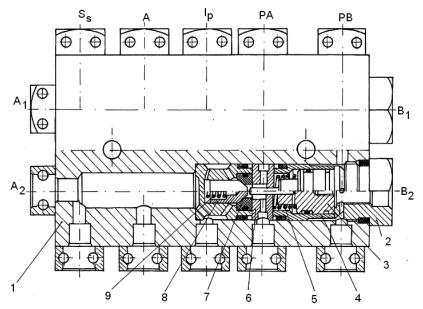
Double deblockable valve of direction: 1-valve body; 2 –piston cover, 3-piston with rod, 4-piston sleeve 5-come-back spring, 6-intermediary sleeve; 7-valve seat, 8-tapered valve; 9-pressure spring
